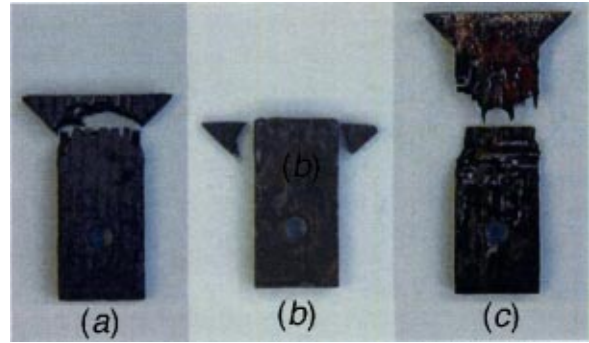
Failure modes of tensile-tested SiC/SiC fasteners, (a) as-manufactured material, (b) “ear” shear failure of exposed material, (c) failure associated with pre-existing cracks
